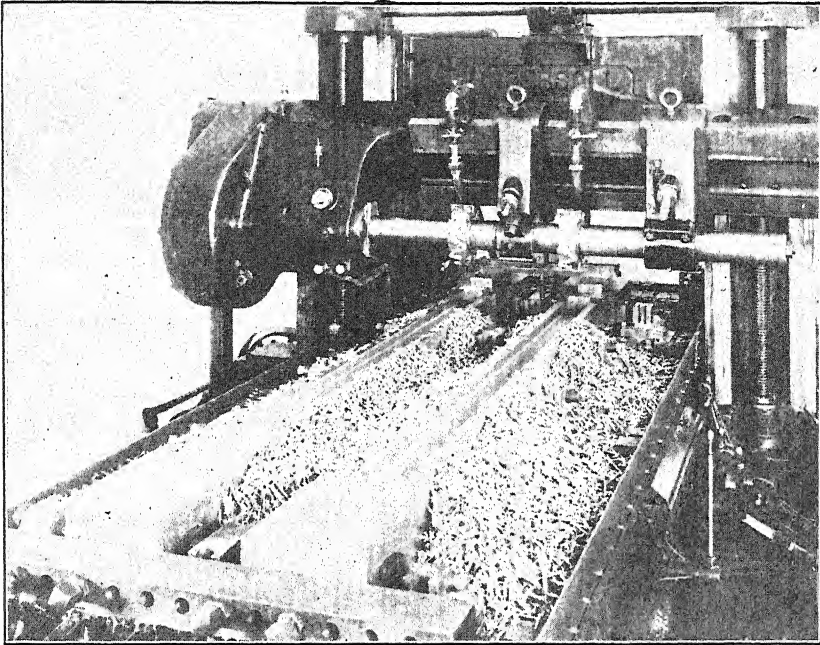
The No. 41 Lucas Horizontal Boring Machine with Dial Indicator Indexing Device Set Up to Bore Its Own Speed-Change Gearbox for Antifriction Bearings.
